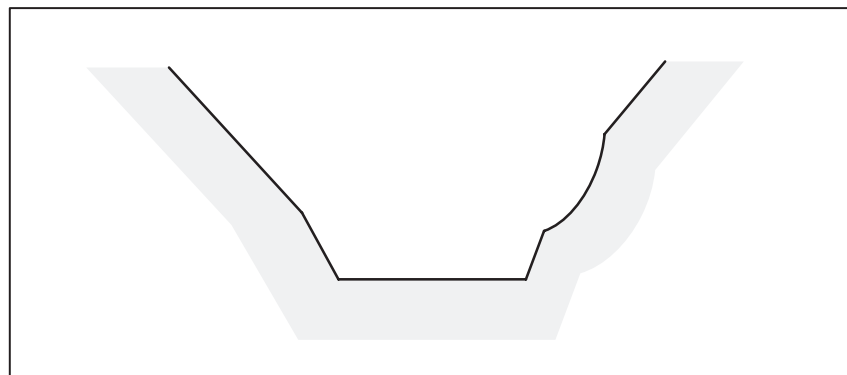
(d) Figure Which Can Be Machined (Monotonic change) in Stock Removal in Turning (Type II)
